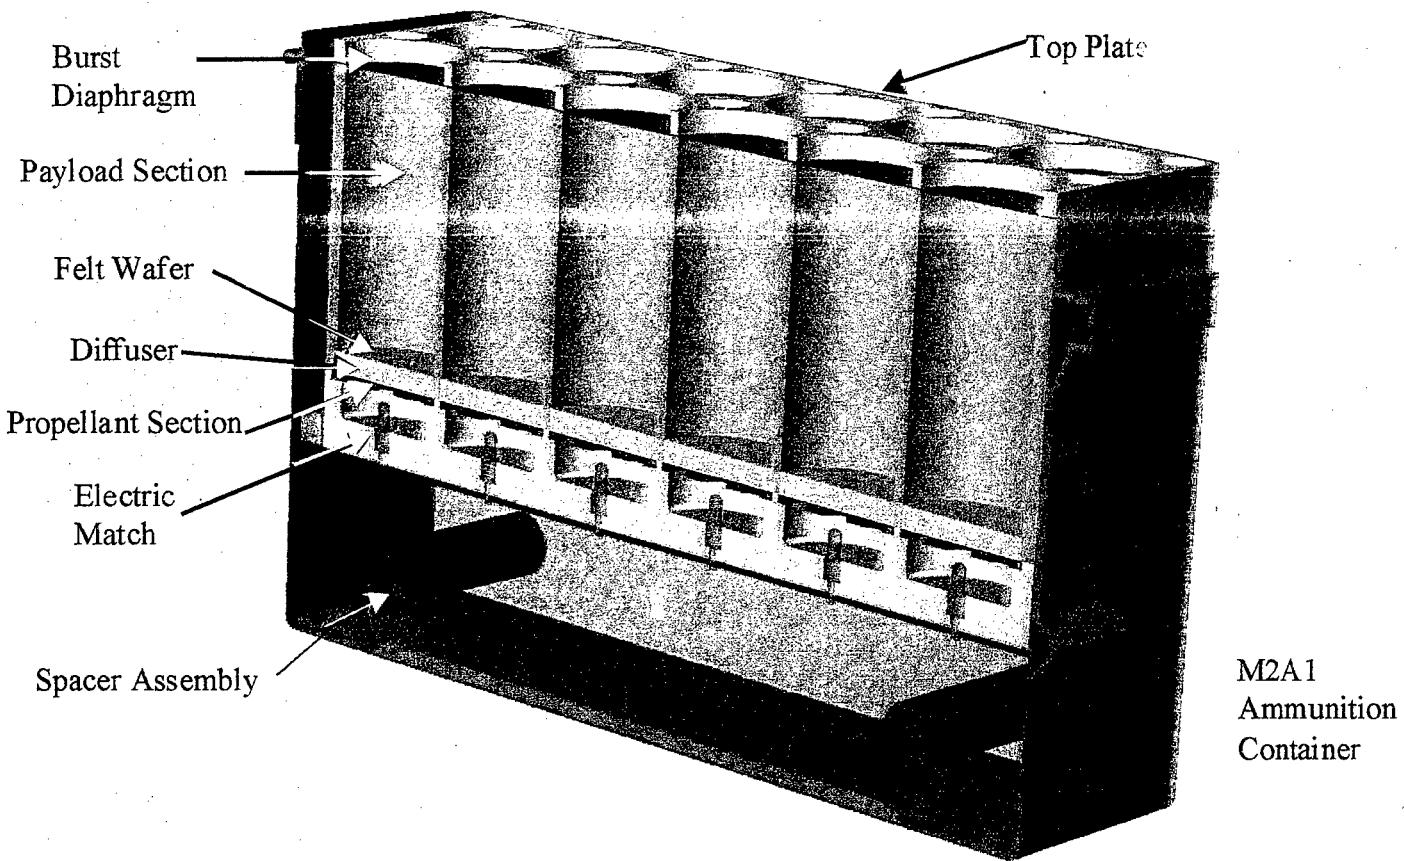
Smoke aerosol dispenser unit assembly configuration.
